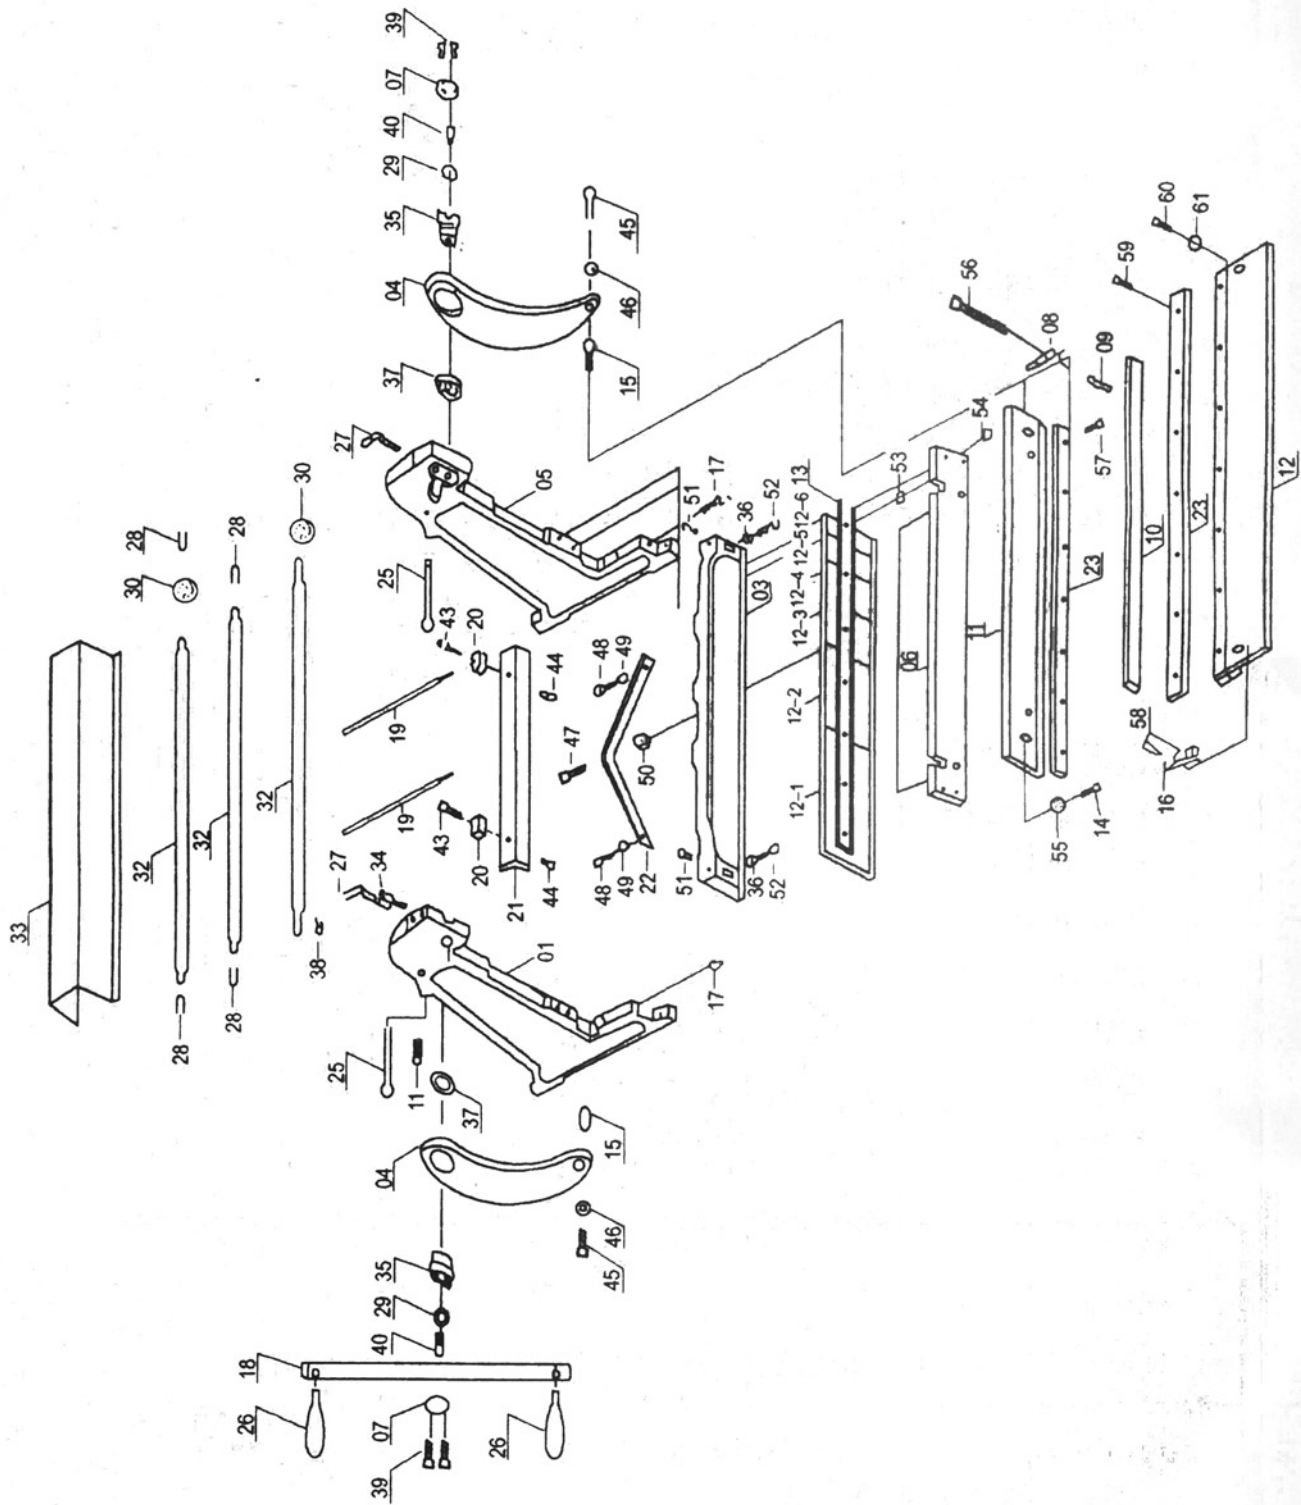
Repair Parts Illustration for 3-in-1 Press Brake Machines
